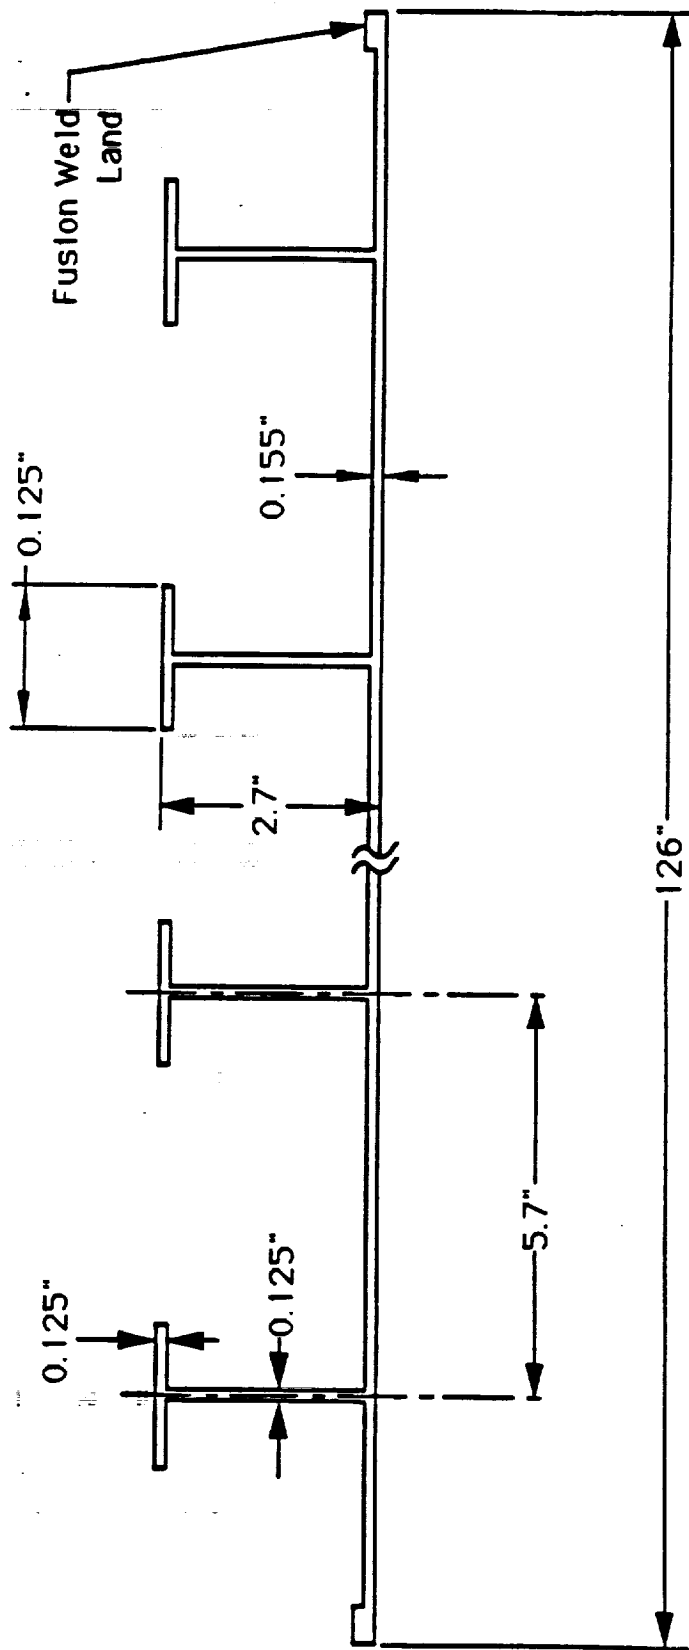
Machined Panel Configuration, Integrally Stiffened.
